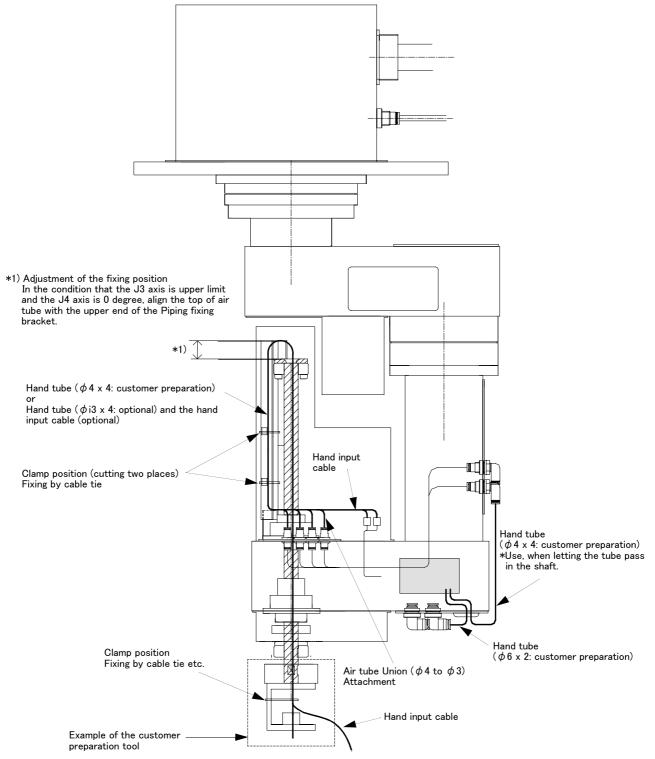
Example of wiring and piping $\langle 1 \rangle$ (Floor installation type)
